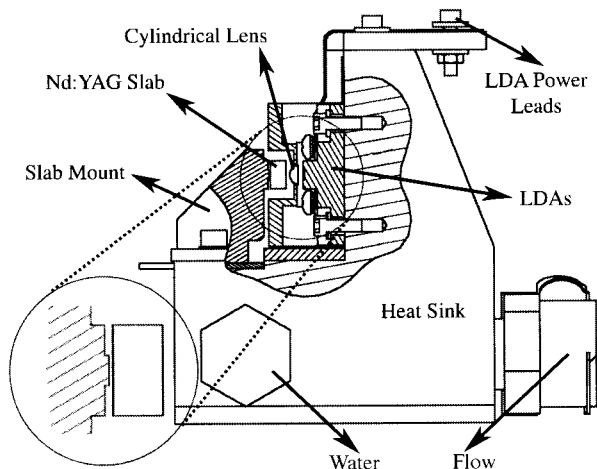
End view of the HELT pump head. This version shows an integrated water path at the base, but the present design is clamped to a water-cooled plate to better simulate conductive cooling for the complete assembly. Note the stepped slab mounting surface in detail.
